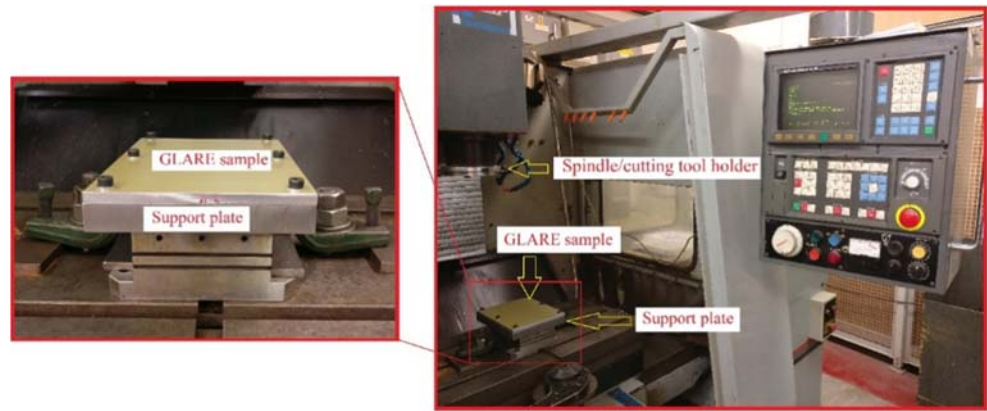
Setup of the GLARE® laminate inside the CNC machine [49]
